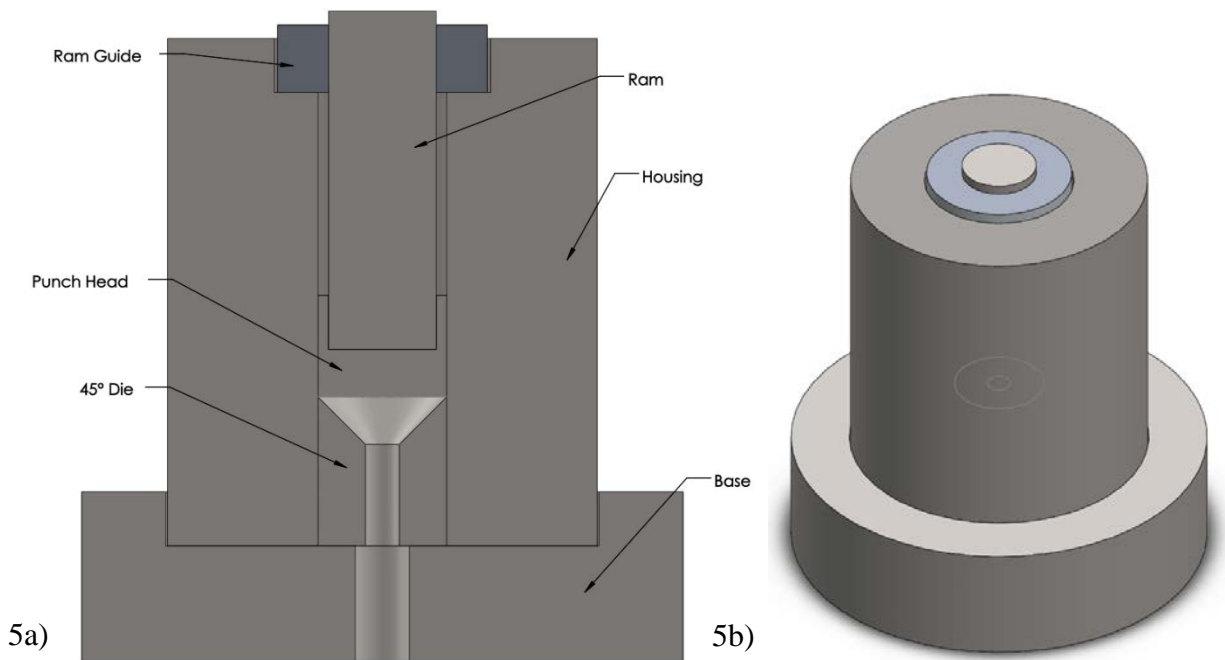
Solidworks model of Extrusion Die Machine assembly. a) Extrusion Die Machine labeled cross-section. b) Extrusion Die Machine assembly.
